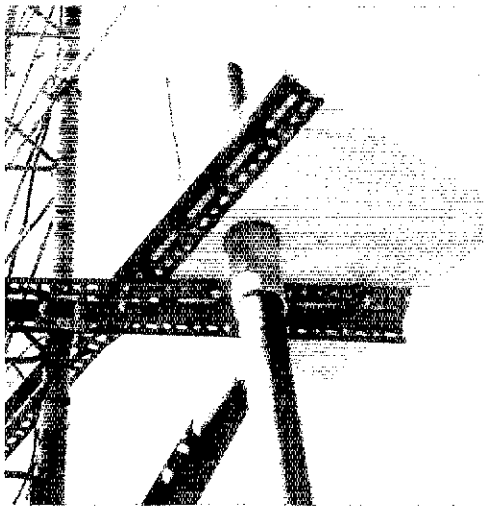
This upper mast support is made from a special  $\frac{3}{4}$ -inch plastic plate and an aluminum-pipe bearing, but a steel plate and a common flange-type thrust bearing should be used in your application. Washers between the plate and the angle stock allow easy leveling of the plate so that the mast doesn't bind in the collar.
